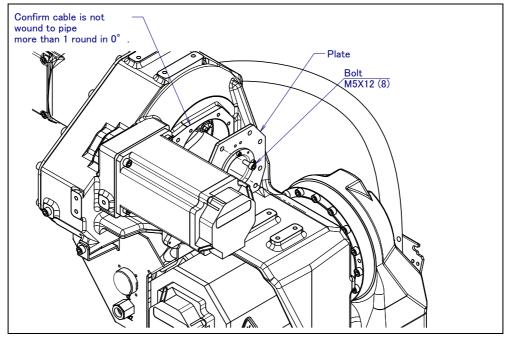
(b) Check the cables (J4-axis) (M-20*i*A/20MT/35MT)
